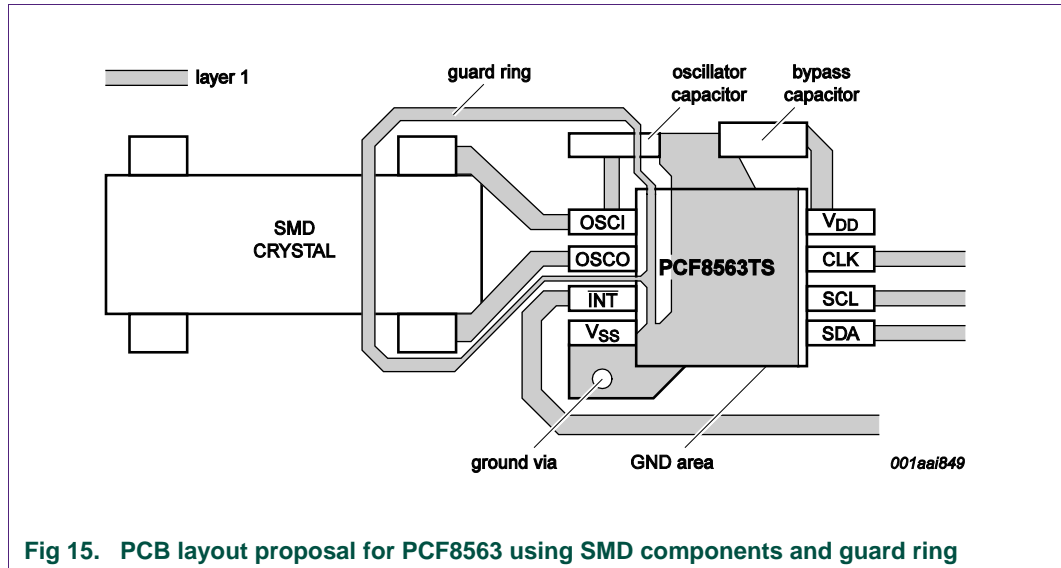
PCB layout proposal for PCF8563 using SMD components and guard ring
